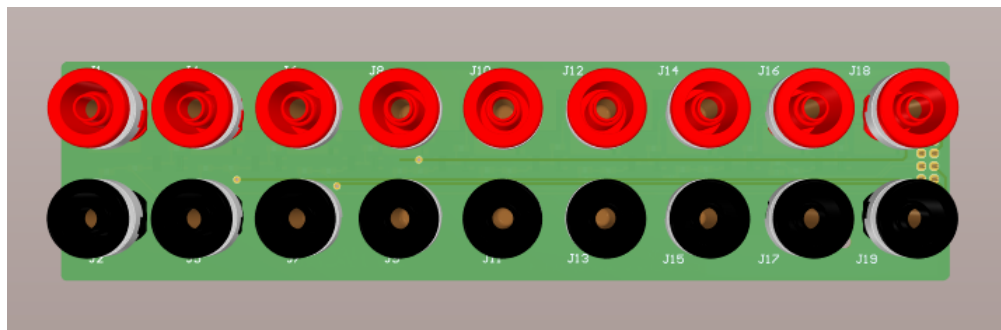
[Printed Circuit Board \(PCB\) 2](#) top view
